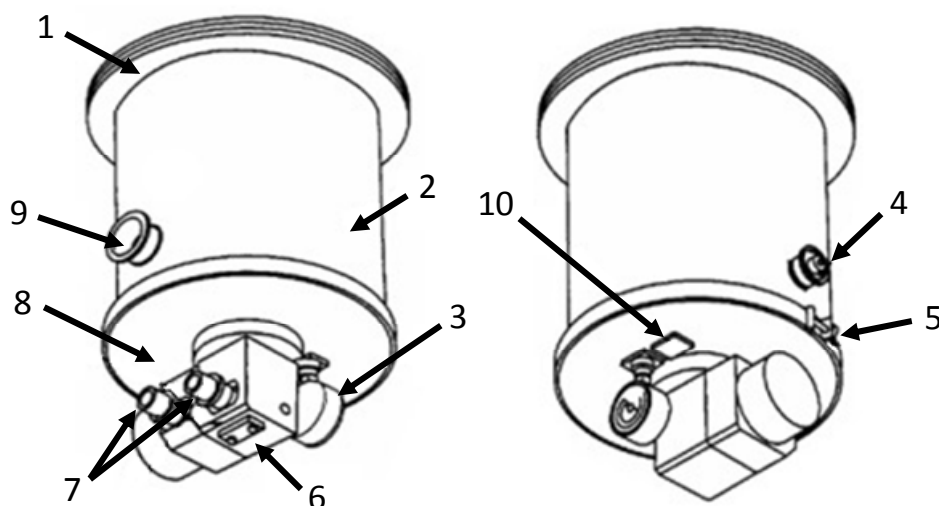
External view of Coolstar 1500 and 3500 cryopumps
